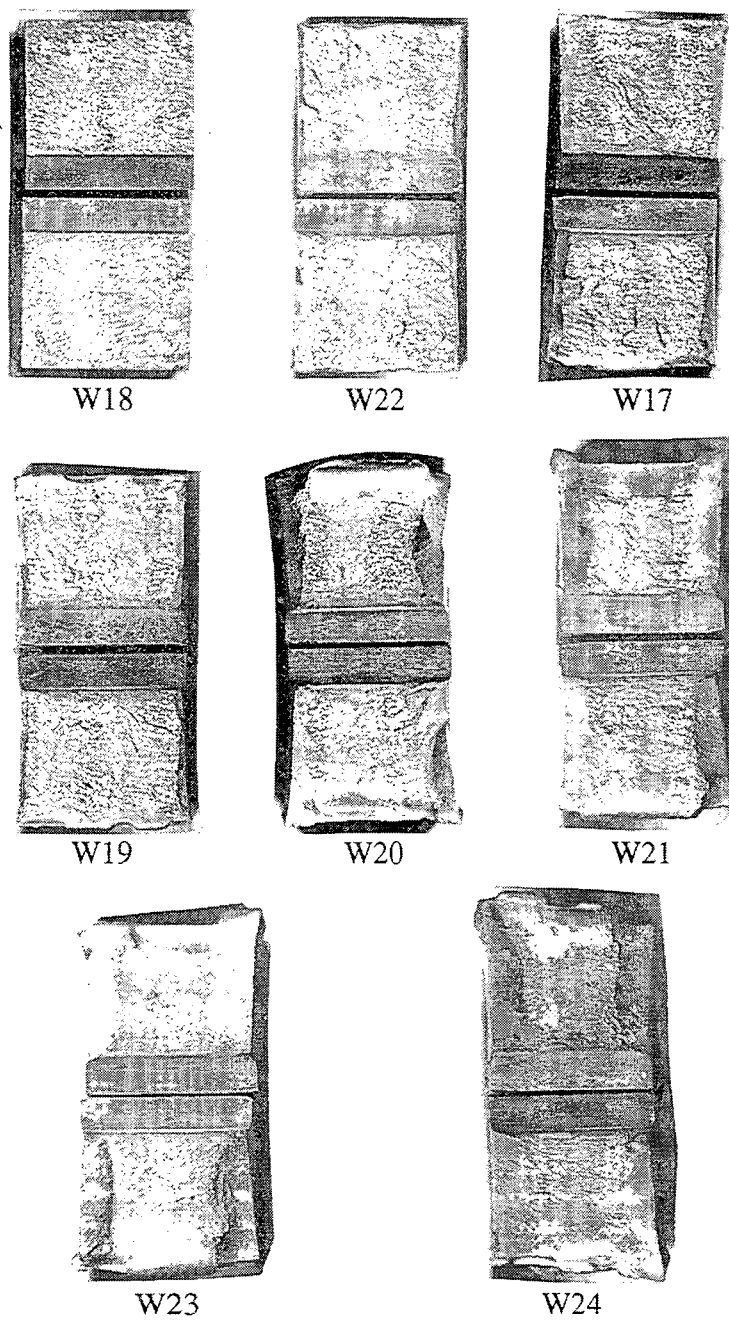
Charpy Impact Specimen Fracture Surfaces for Kewaunee Reactor Vessel Surveillance Weld Metal
